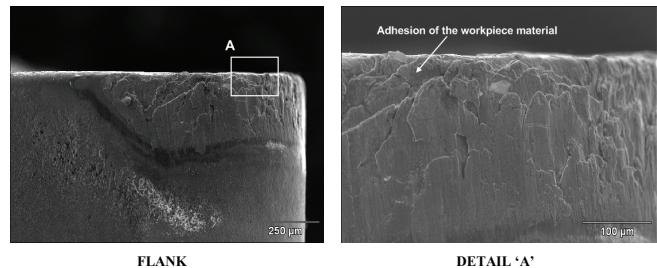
Flank wear land of the cutting edge used to cut the L2 alloy at the end of tool life - $v_c = 250$ m/min.
